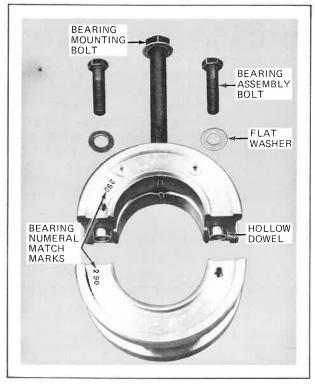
CAMSHAFT BEARING ASSEMBLY.
